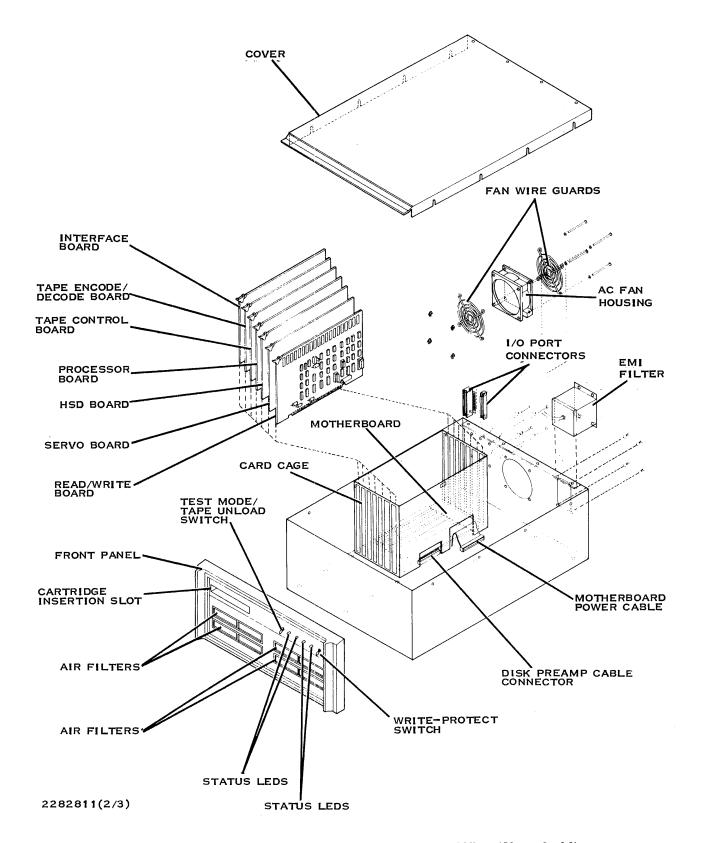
WD800 Mass Storage System — Exploded View (Sheet 2 of 3)
